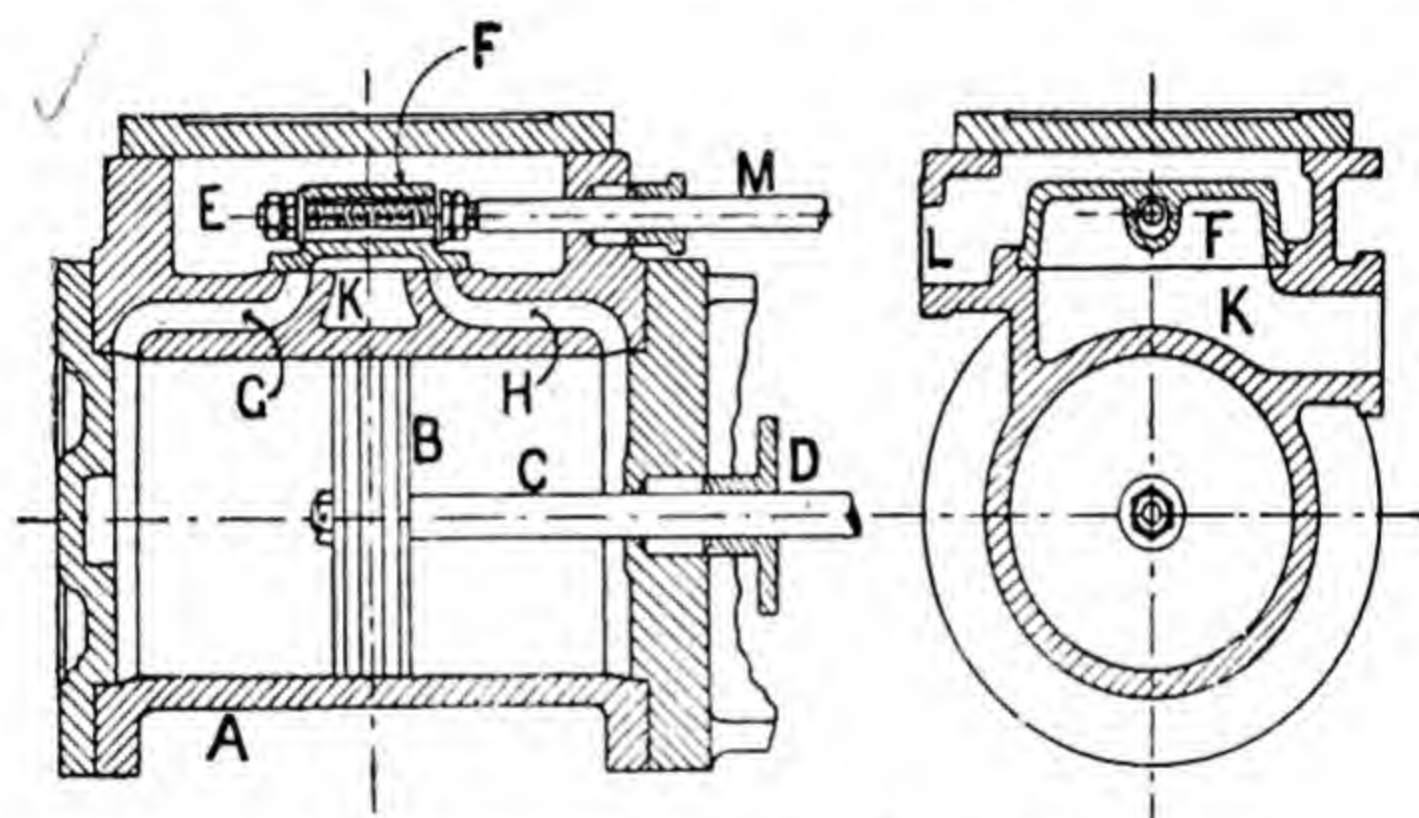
Sectional side and end elevations of a steam engine cylinder.
